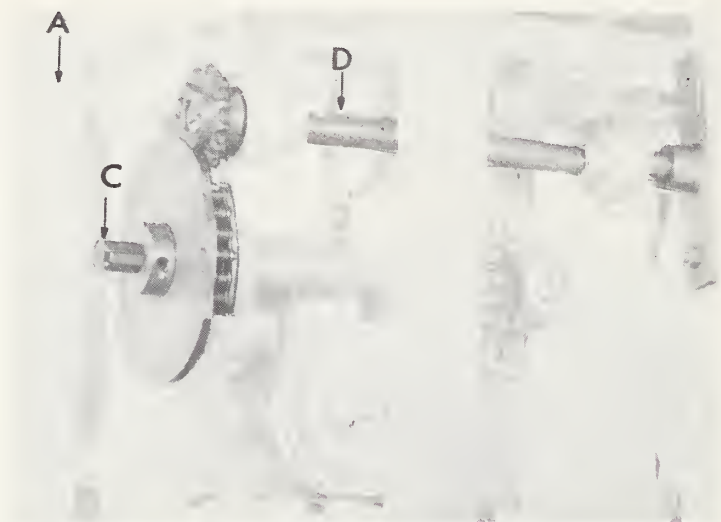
Intermittent gear on shaft C and mating gear (sprocket) on shaft D after plungers reach bottom of stroke. When the driving sector of the intermittent gear is disengaged from its mating sprocket (at either top or bottom of stroke) shaft D is prevented from turning by one of the concave sections on the projecting hub of its gear matching concentrically with the flange of the intermittent gear.
